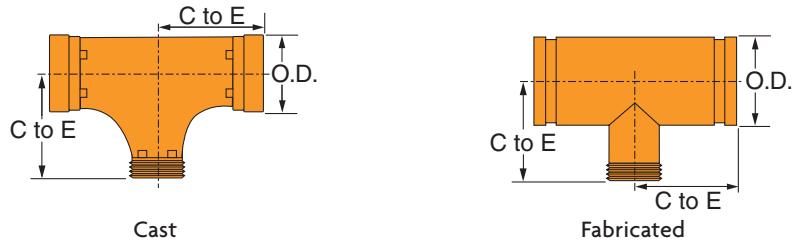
REDUCING TEE WITH THREADED BRANCH
